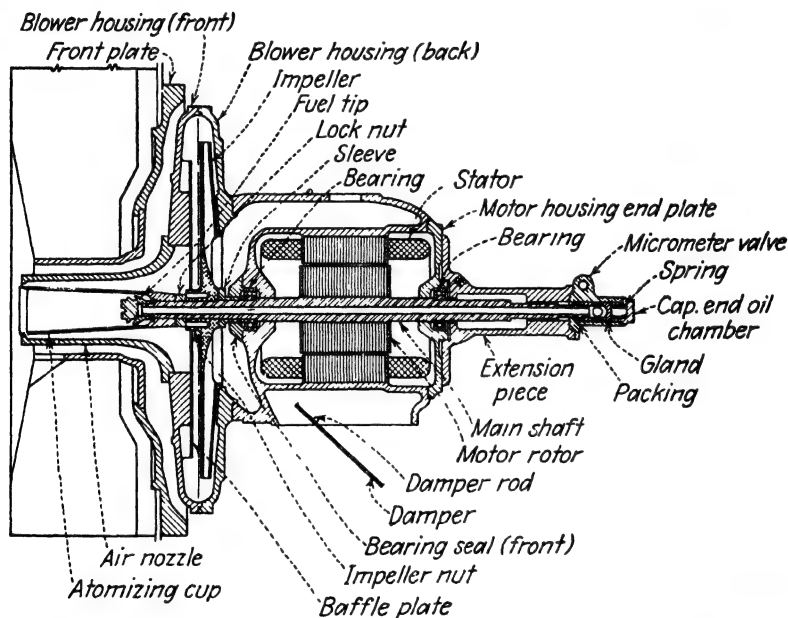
Sectional view of horizontal rotary-cup burner, showing blower. (Courtesy of National Airoil Burner Company.)
